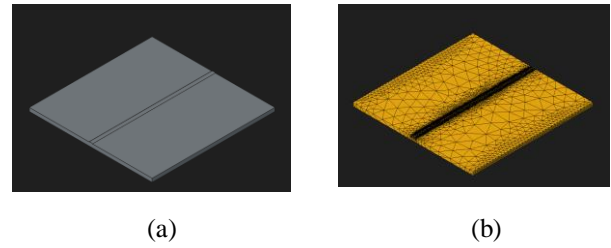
Weld Joint; (a) 3D Model, (b) Mesh Model
